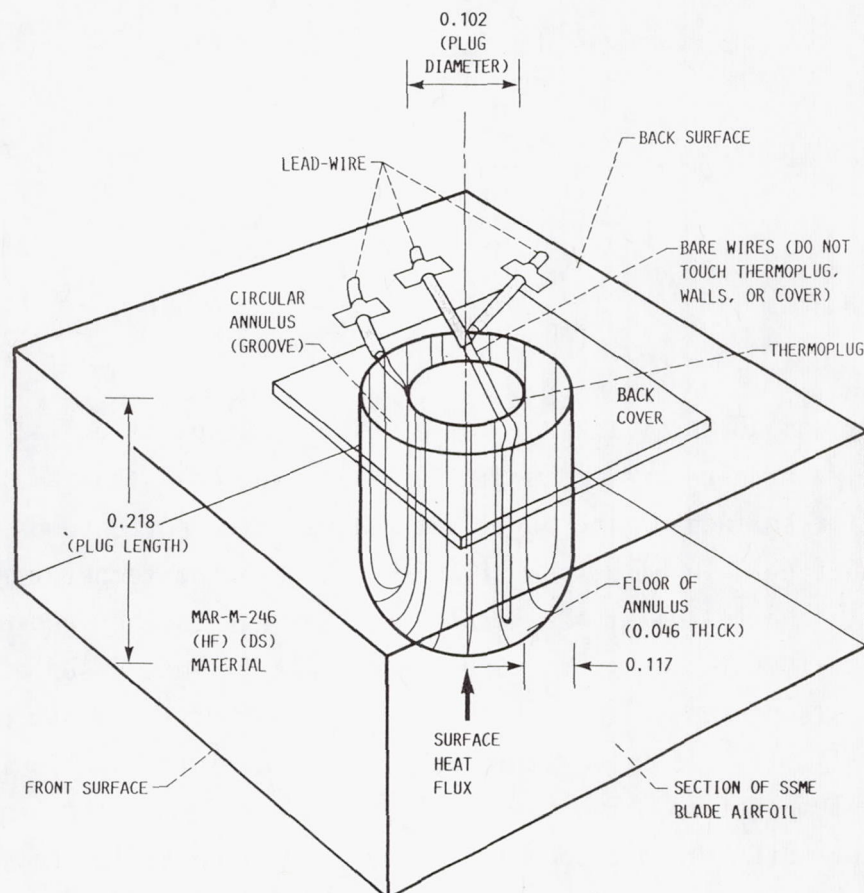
PLUG HEAT FLUX GAGE (DIMENSIONS IN CENTIMETERS).
